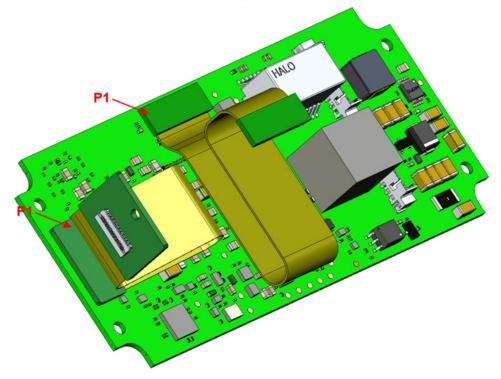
Connecting Interposer Cables to FRAMOS D4 Visual Processing Board
